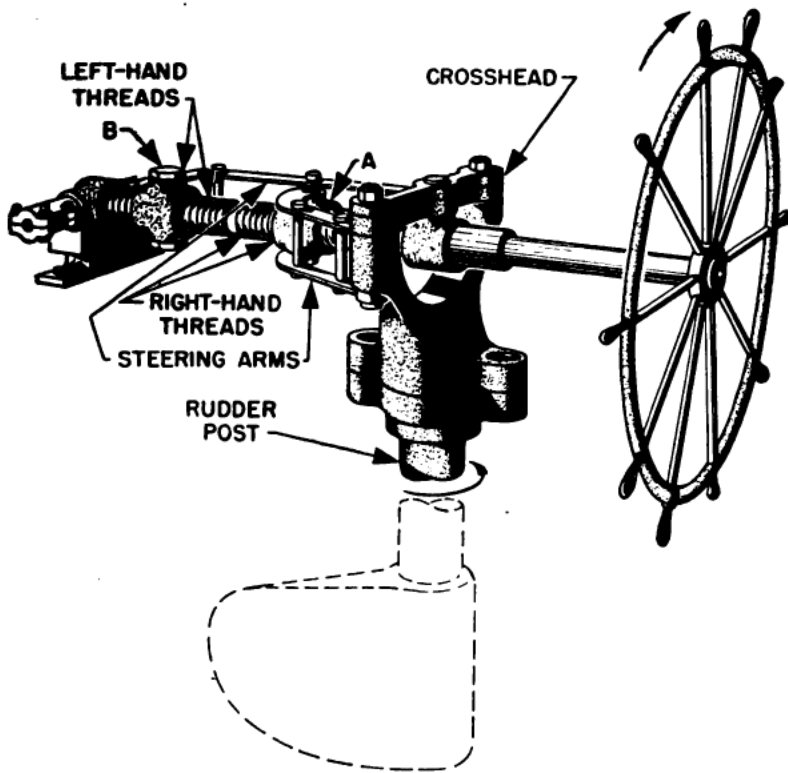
The screw gear gives a tremendous mechanical advantage.
